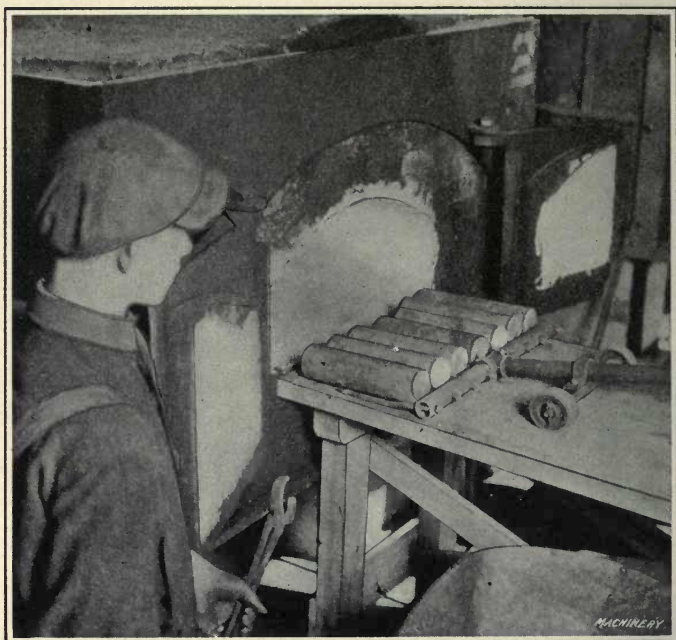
Heating Russian High-explosive Shell Forgings for Hardening
